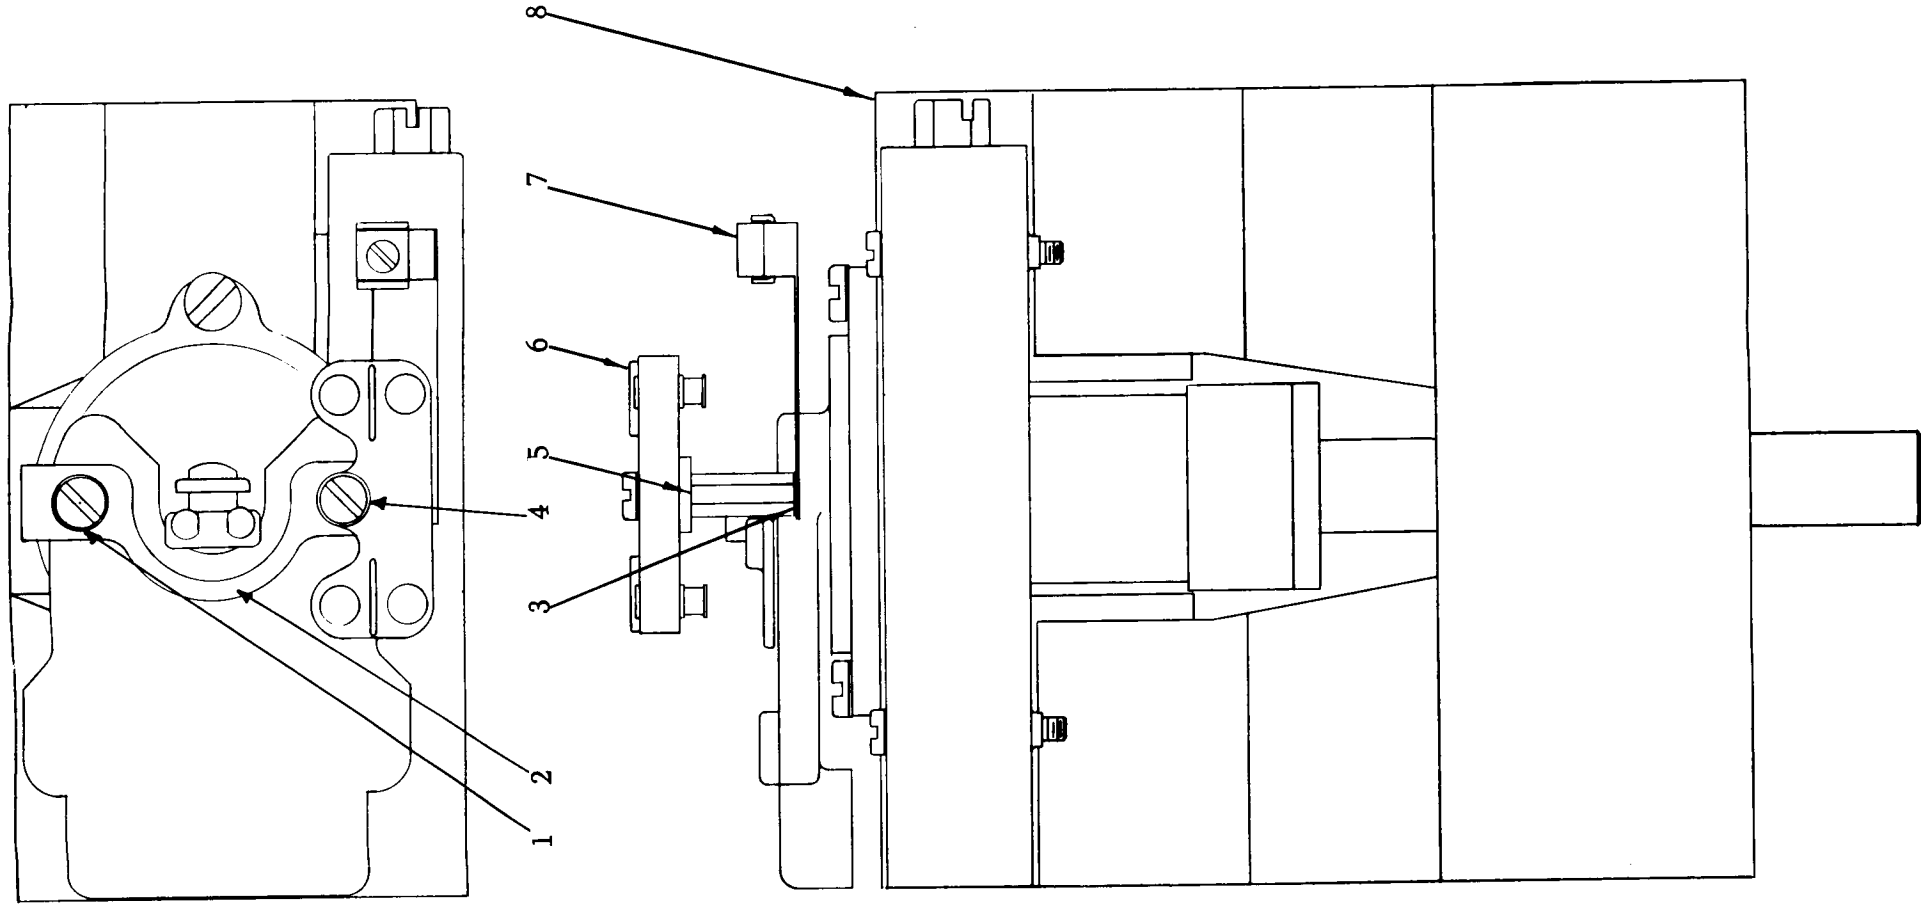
PAPER INDICATOR ASSEMBLY 358-100-C15
